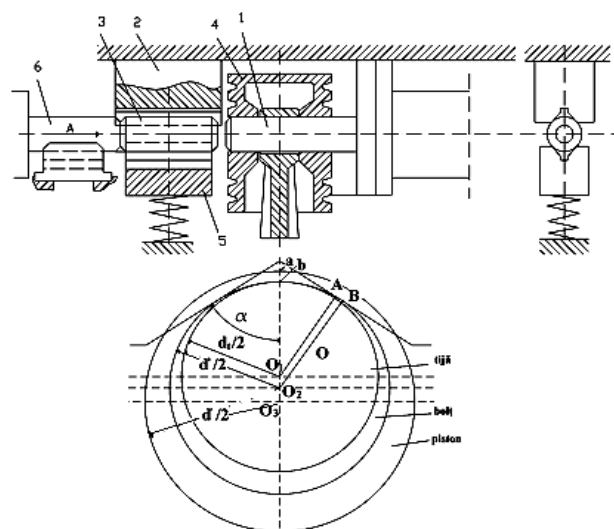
The mounting of the bolt in piston with help a fixed prism.
